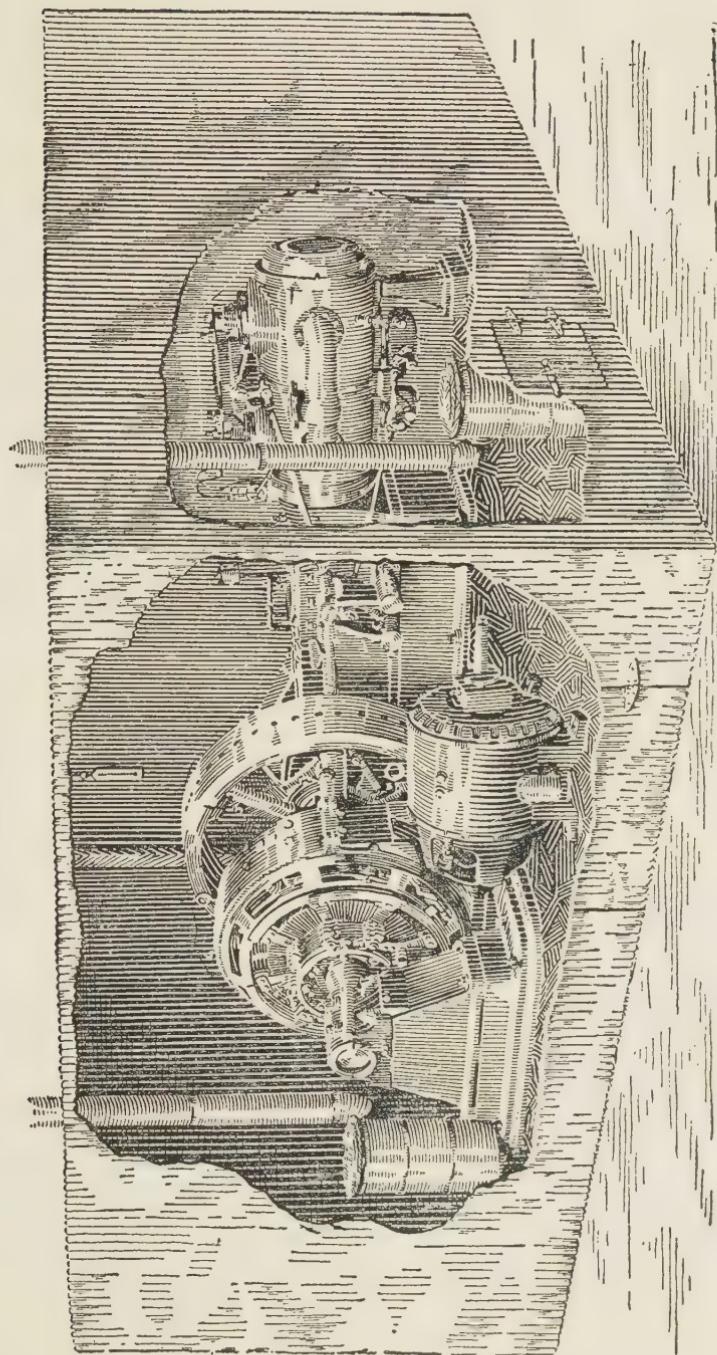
IRON BOX AND ARRANGEMENT OF EQUIPMENT INSIDE FOR DRYING
